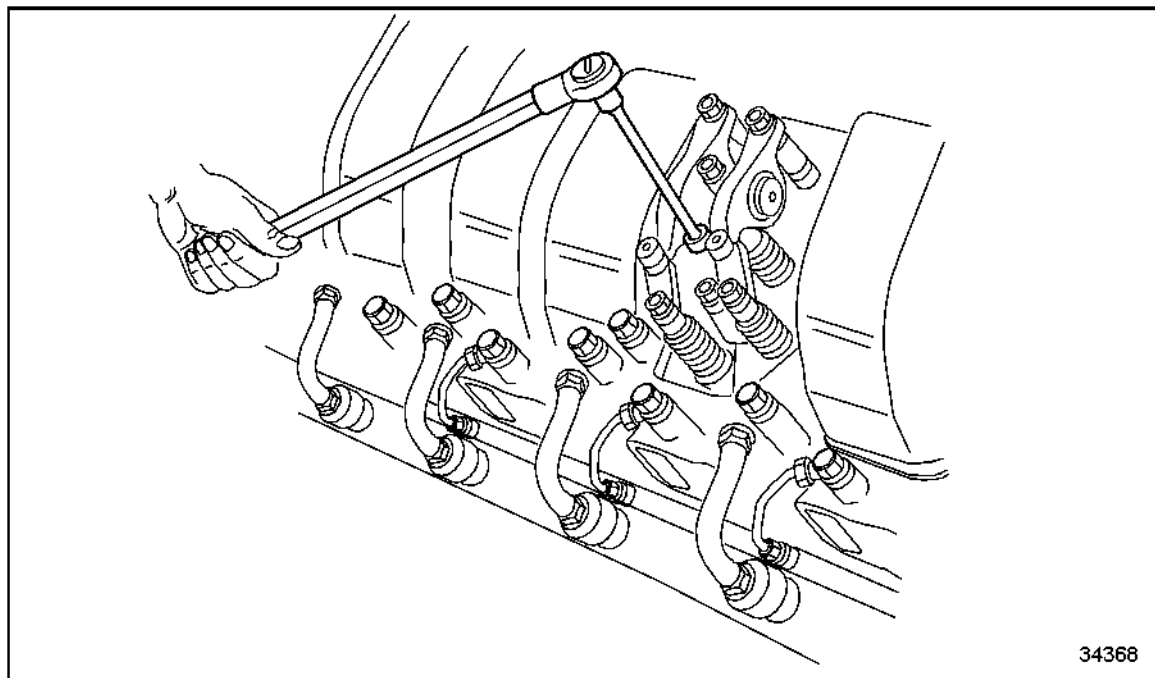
Tightening Bolt of Injector Hold-down Clamp
